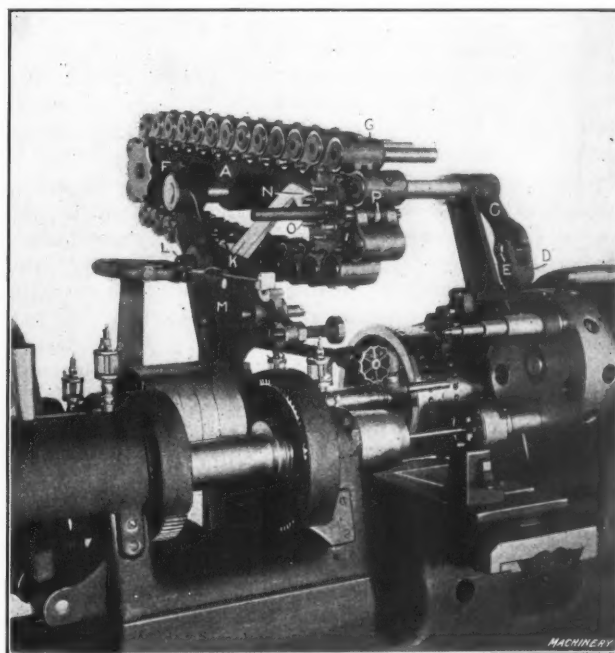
Rotary Tilting Magazine Attachment tilted up to clear the Turret Tools
